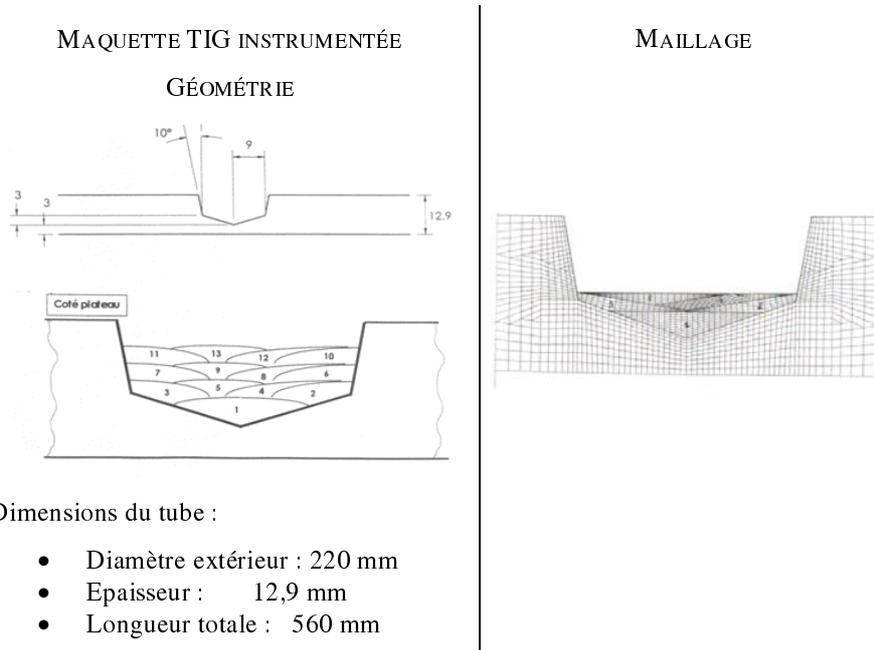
Scheme and mesh of the welding beads in the A13pipe mock-up
